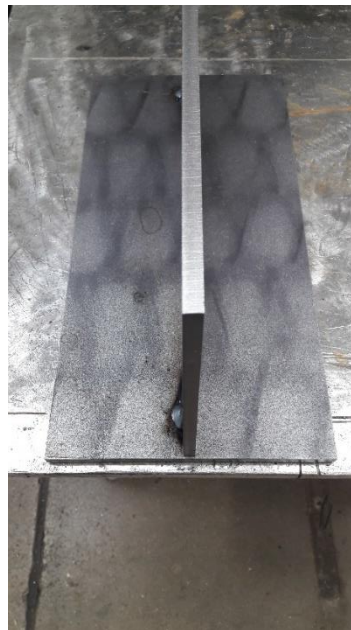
Specimen for fillet weld ready to be welded.
